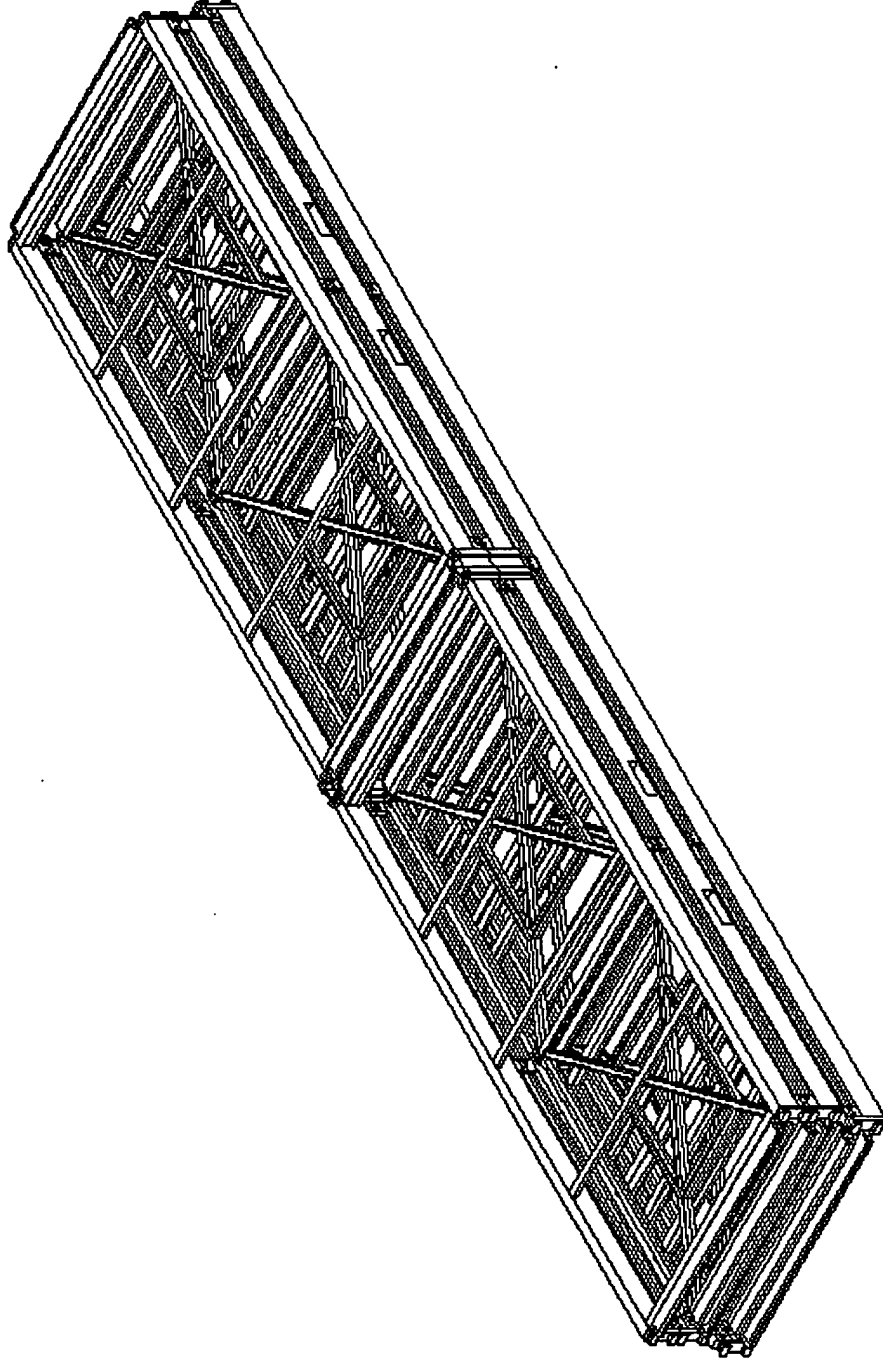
C: Step2 of disassemble and load process: The first "collapsible cargo container frame panel assembly" is stacked on top of previous assembly shown in FIG.39A/C/D
